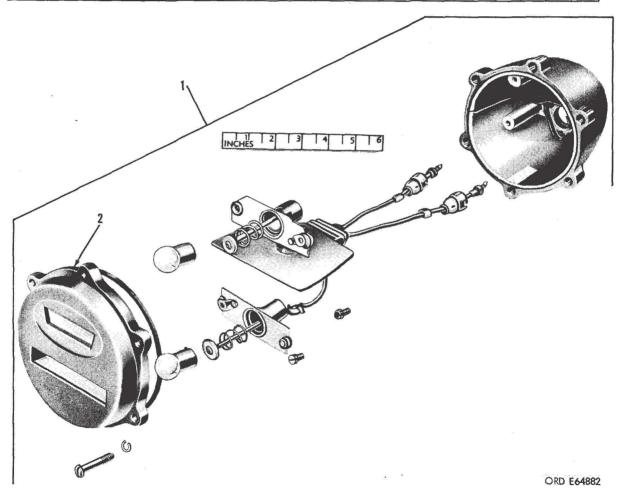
Right service, blackout tail, and stoplight assembly - exploded view
